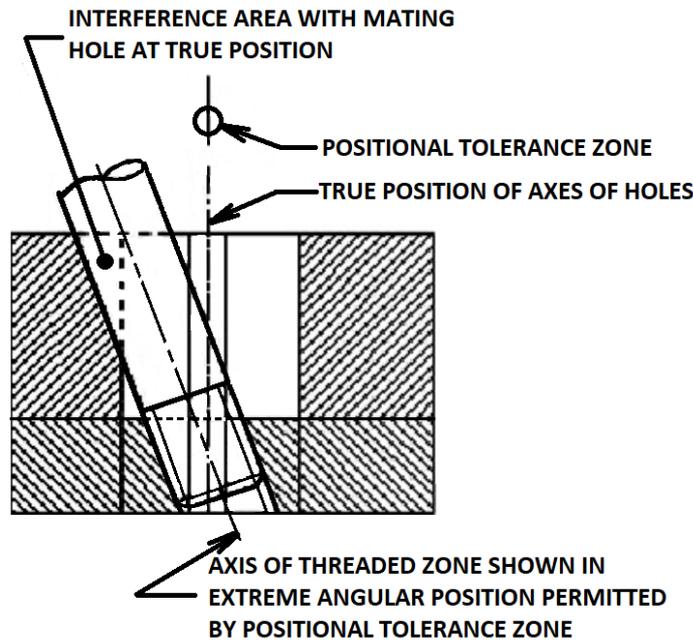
Interference which might occur even when the hole is made within true position tolerances [13]
